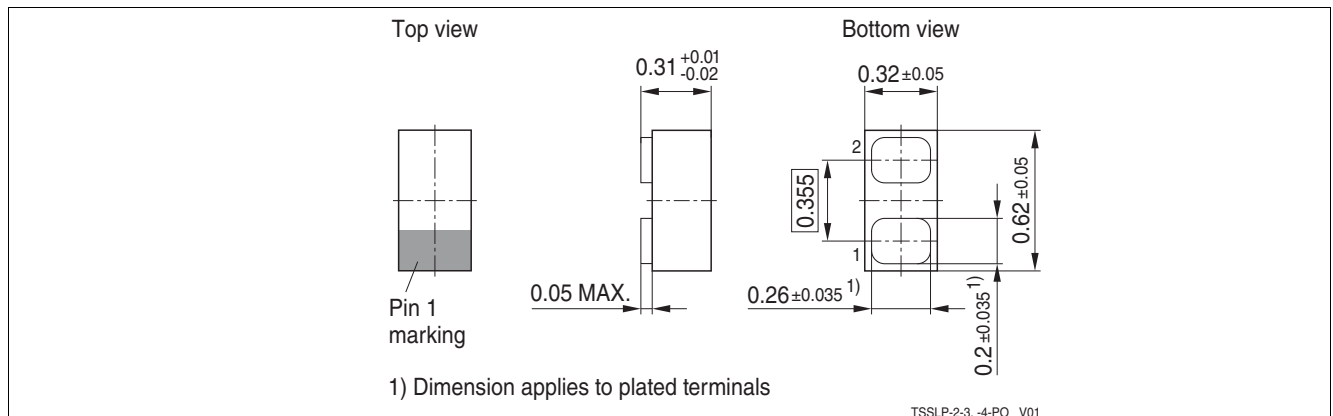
TSSLP-2-4 Package outline (dimension in mm)
